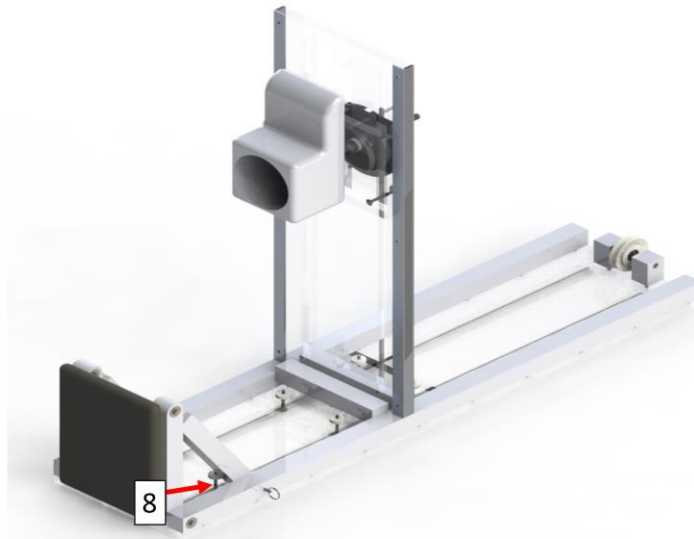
CAD Geometry of Posterior Pulley Plate Component in Bottom Base Assembly
